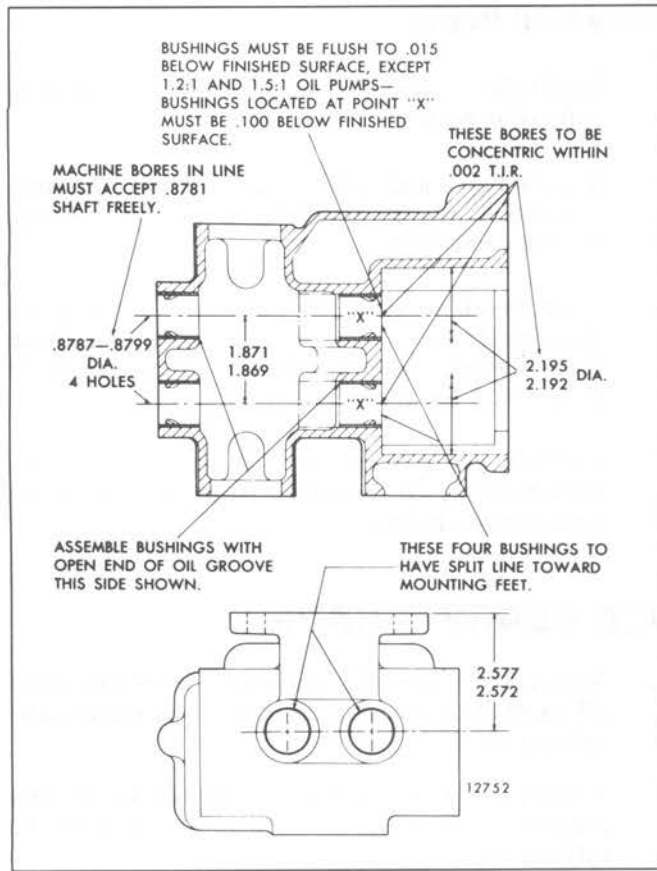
Diameter and Location of Bushing in Oil Pump (6V-92 and 8V-92 Engine)
